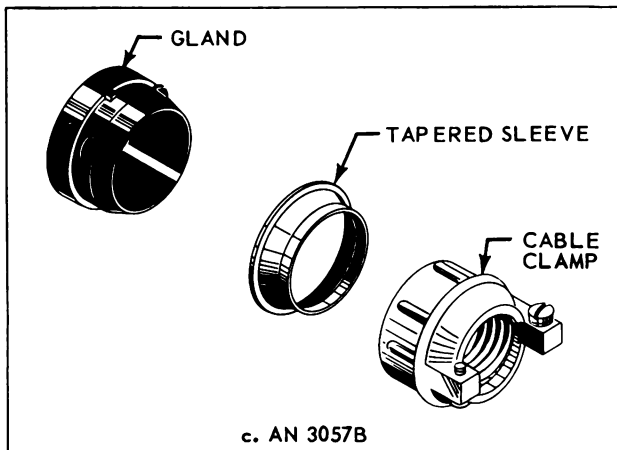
AN 3057 Cable Clamp Types - Exploded View
